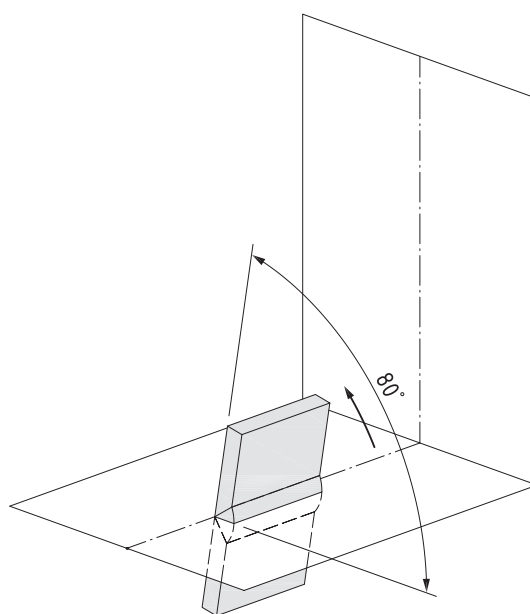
Welding position PC slope and rotation limits for butt welds
